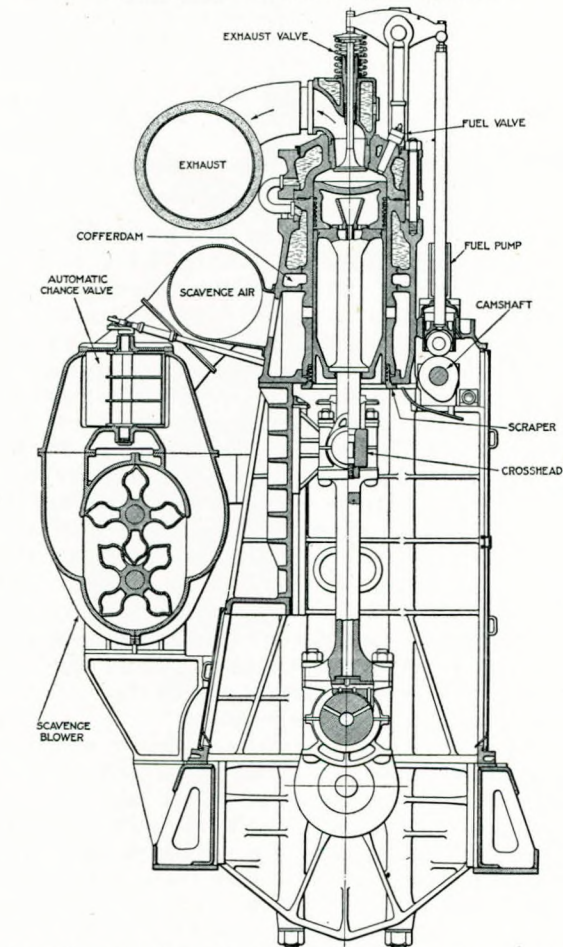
A.—Section of single-acting two-cycle crosshead engine.
